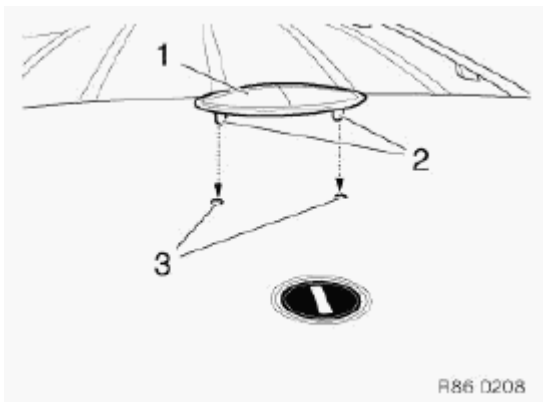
Identifying BMW Badge, Pin & Bore Hole
